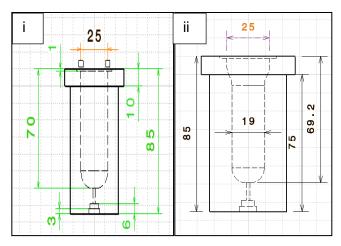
Overall assembly view of injection moulding which consists of male section consists of core plate.
